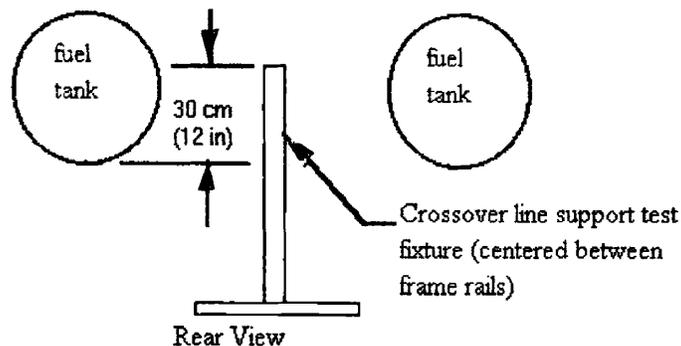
TEST FIXTURE ORIENTATION—CROSSOVER LINE SUPPORT TEST
